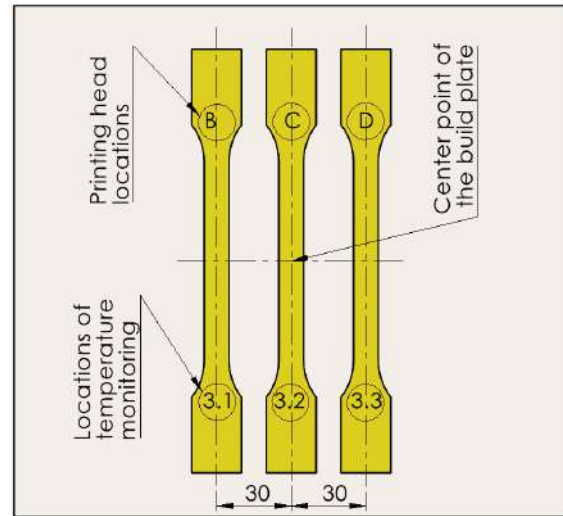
The layout for 3 tensile samples printed simultaneously.
